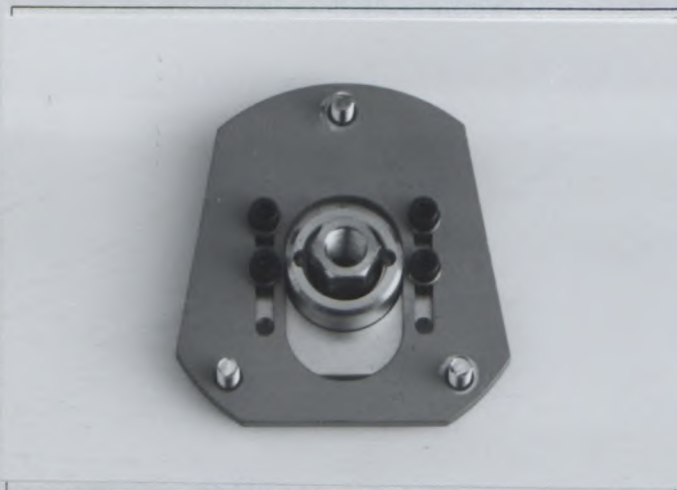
REINFORCED TOP MOUNT, TYPE B
